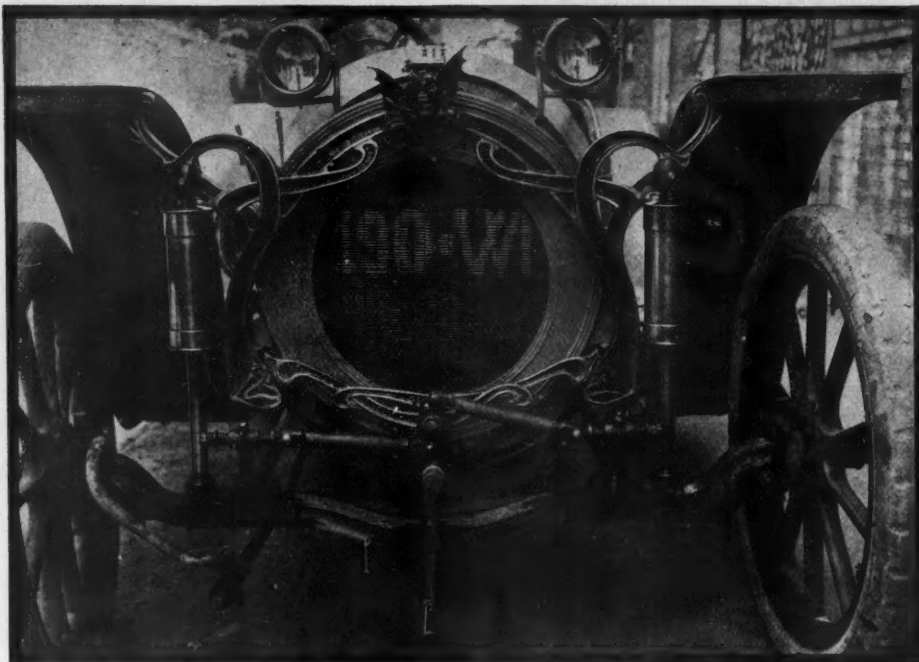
DELPEUCH AIR SUSPENSION FITTED TO RUNABOUT
